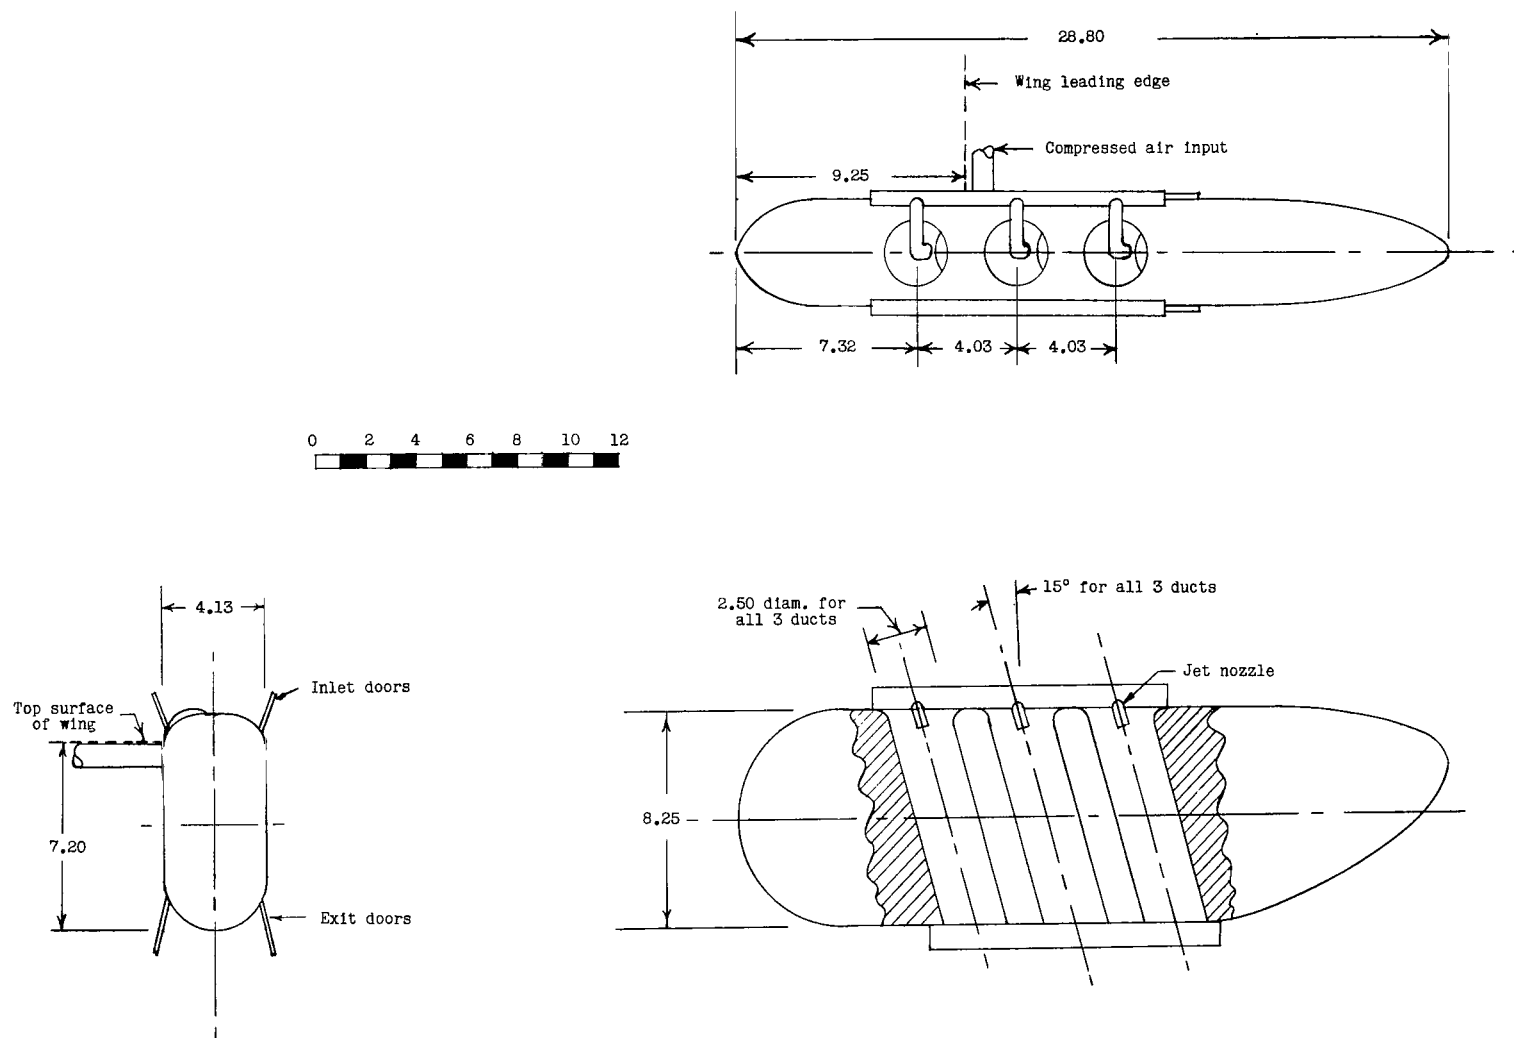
Sketches showing simulated wing-tip lifting engines pod. All dimensions are in inches.
